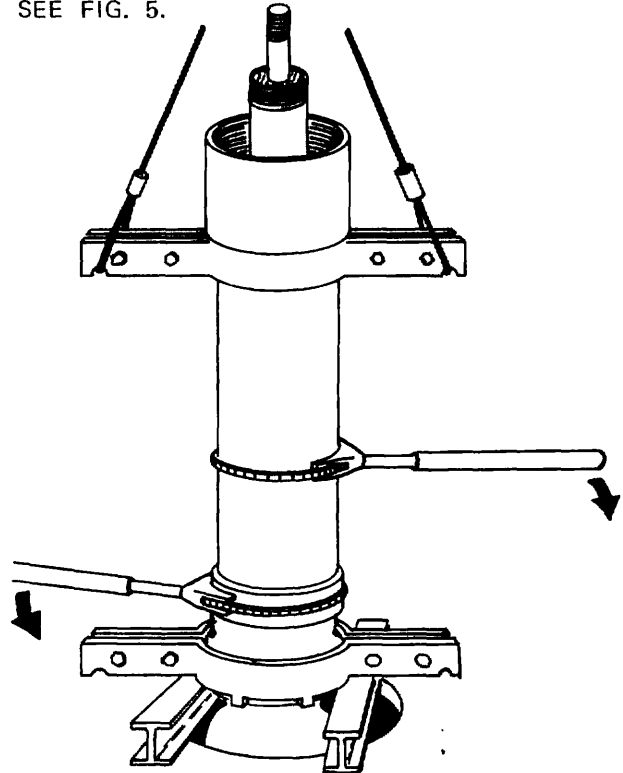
INSTALLATION OF COLUMN PIPE TO BOWL ASSEMBLY.
